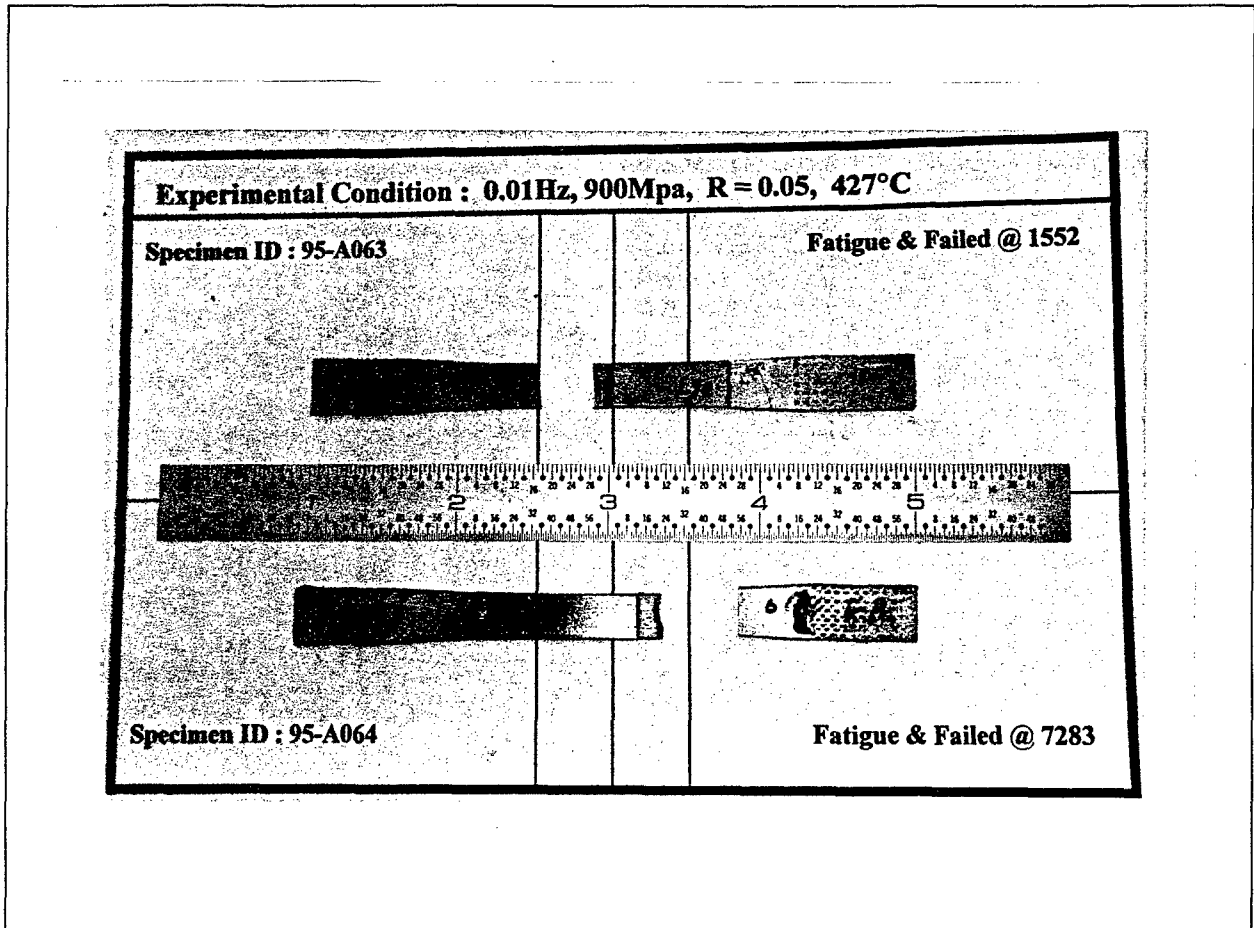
Fractured Specimens ( 95-063 & 95-064 )
